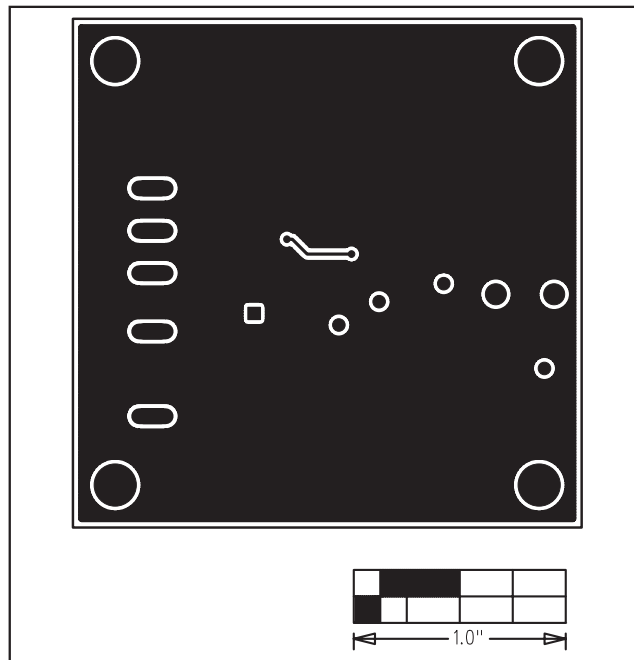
MAX9820 EV Kit PCB Layout—Solder Side
